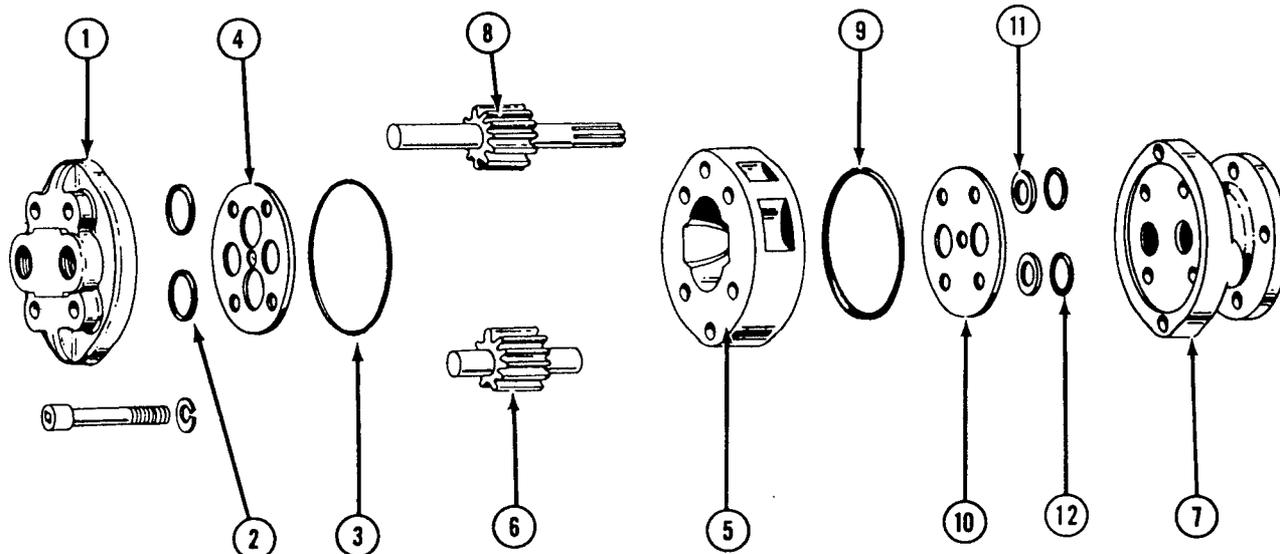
EXPLODED VIEW OF OIL PUMP
